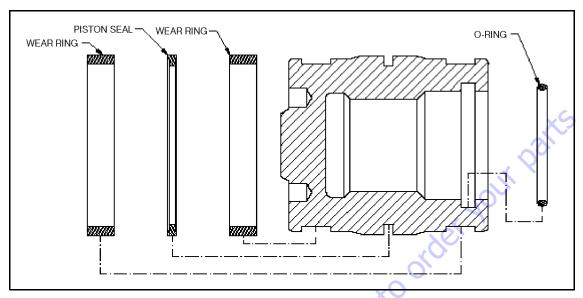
Jib Telescope Cylinder Head Gland Detail
